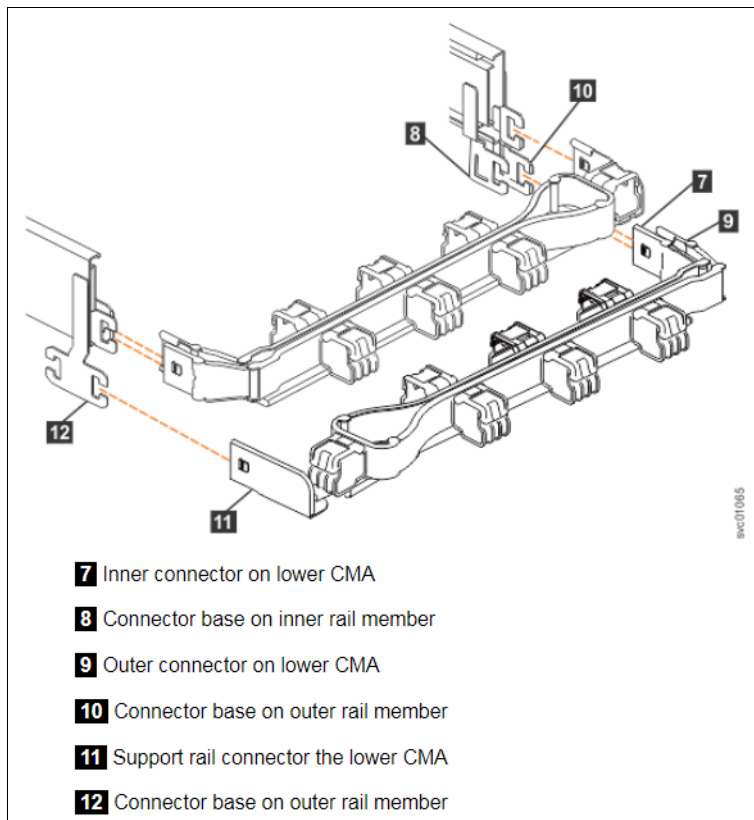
Comparison of upper CMA assembly and lower CMA assembly connectors
